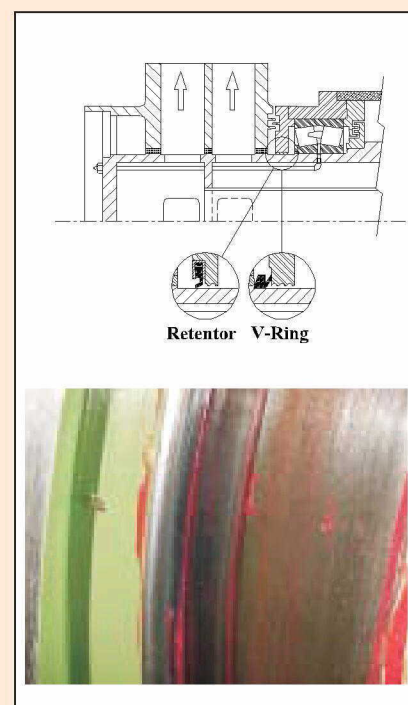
Detail of installation of seal composed by shaft seal and V-ring. The detail shows the installation inside the bearing housing. In this case, we installed this seal in Pickup Suction roll, close to suction box.
